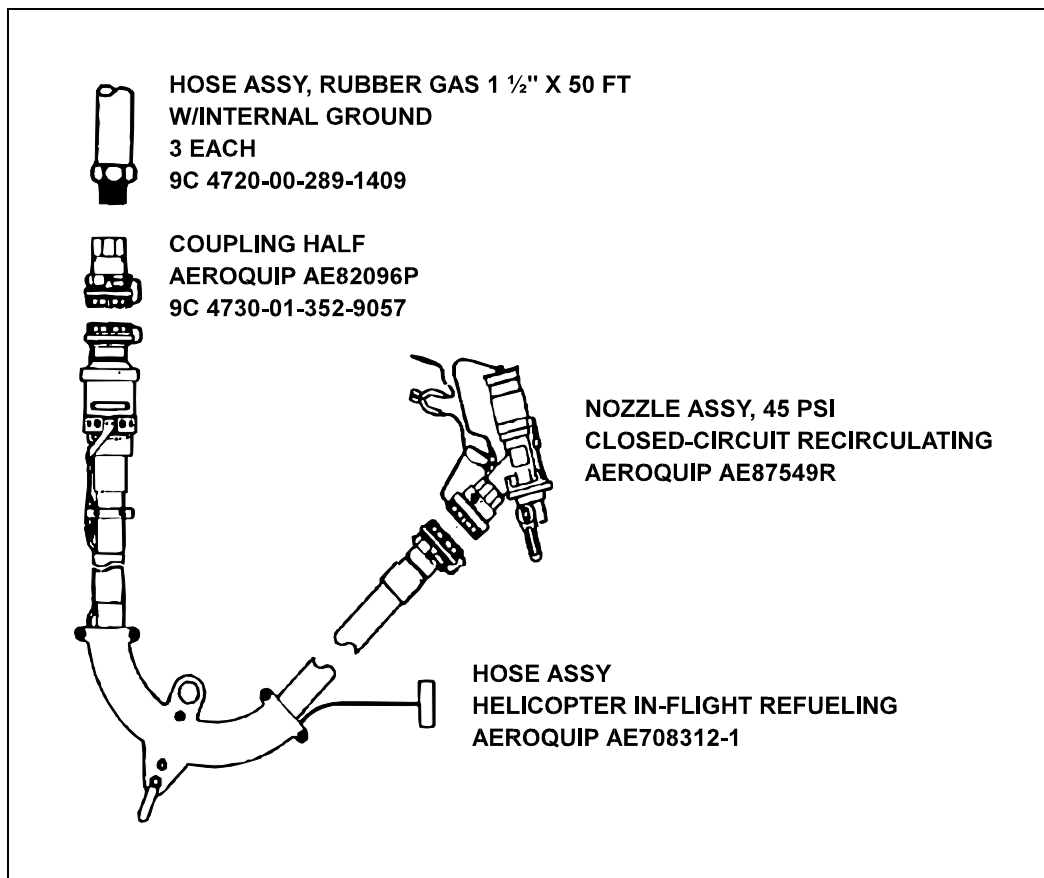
U.S. Coast Guard HIFR Rig Assembly
